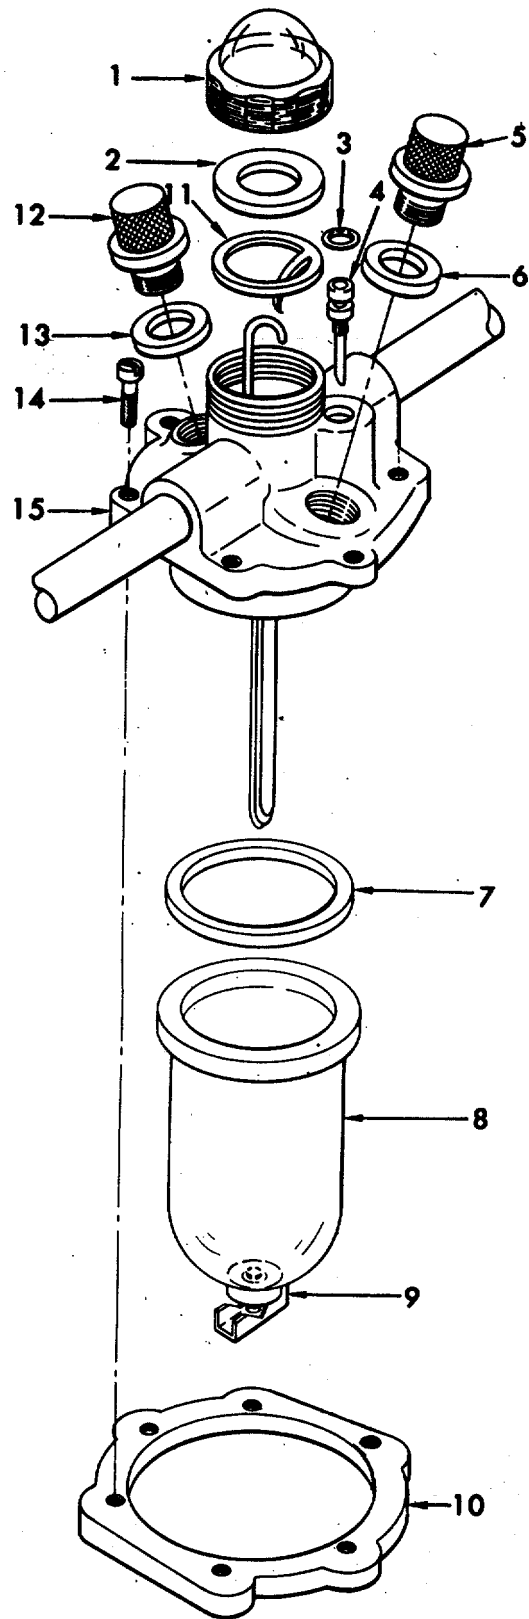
Air Starting Lubricator, Disassembly and Reassembly.
